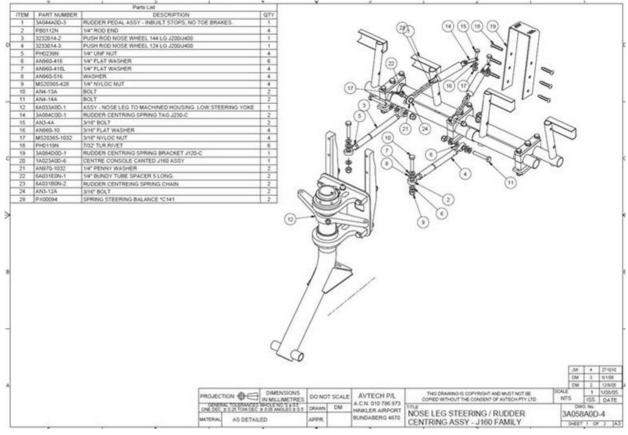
Steering/Rudder Centring Assy – Type 3 (Sheet 1)
